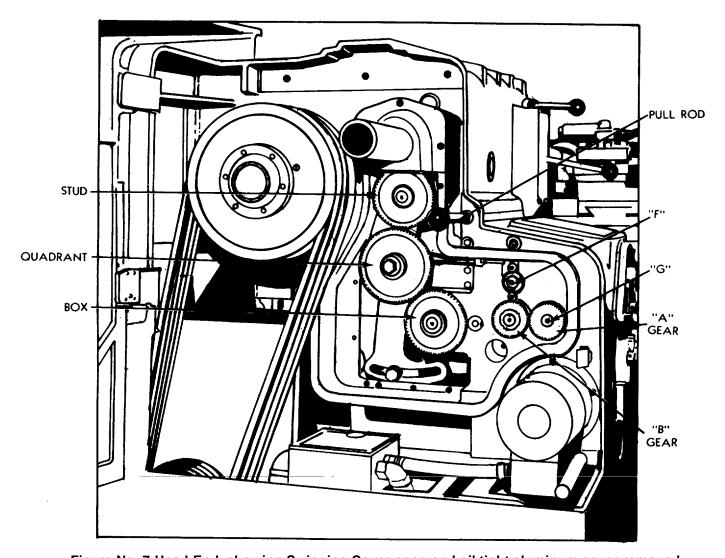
Head-End, showing Swinging Cover open and oil tight aluminum cover removed.
